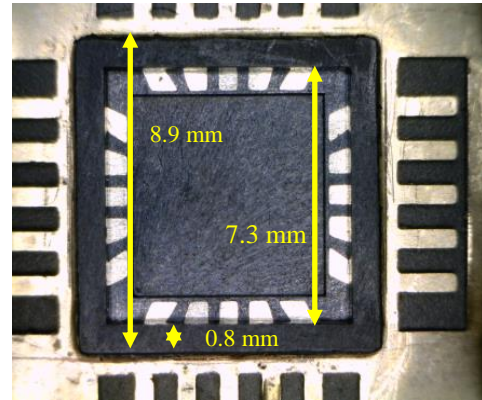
A photograph of an LCP cavity package after surface polishing to remove the initial recess.
